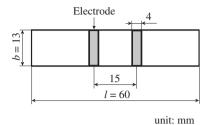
Geometry and dimensions of flexural test specimen with thickness t = 2.4 mm.
